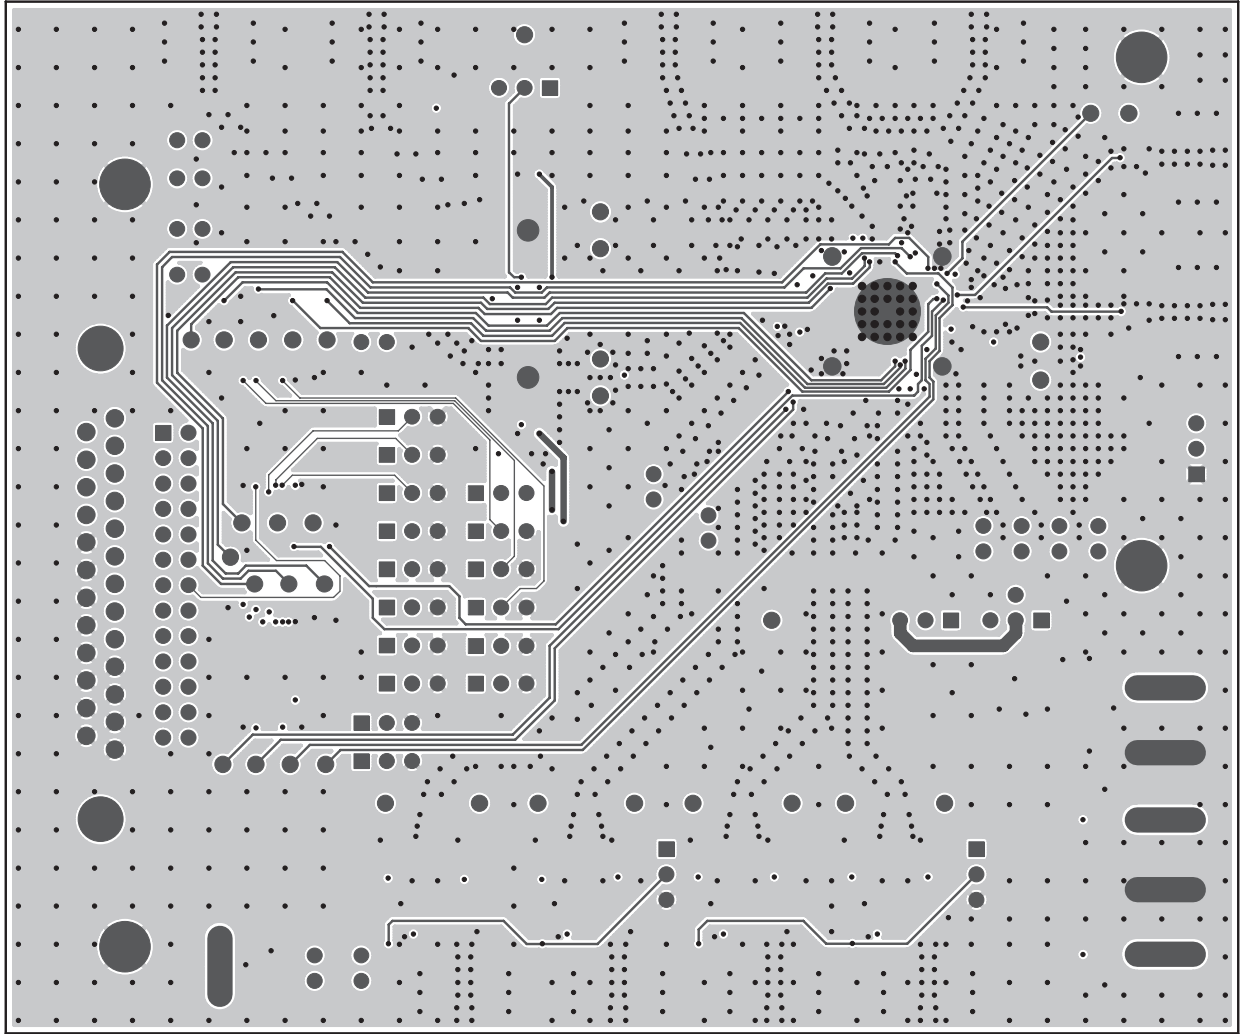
MAX2839AS EV Kit PCB Layout—Inner Layer 3, Routes
